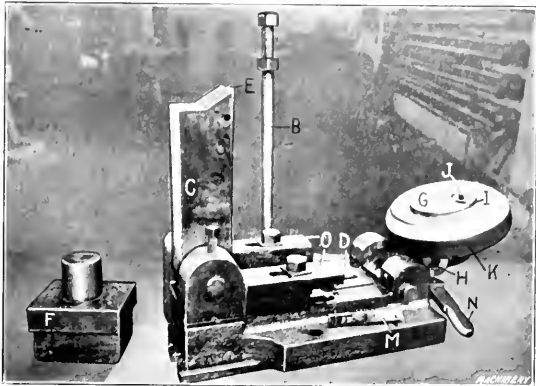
Fixture shown in Fig. 6 with Work removed and opened up to show Construction
